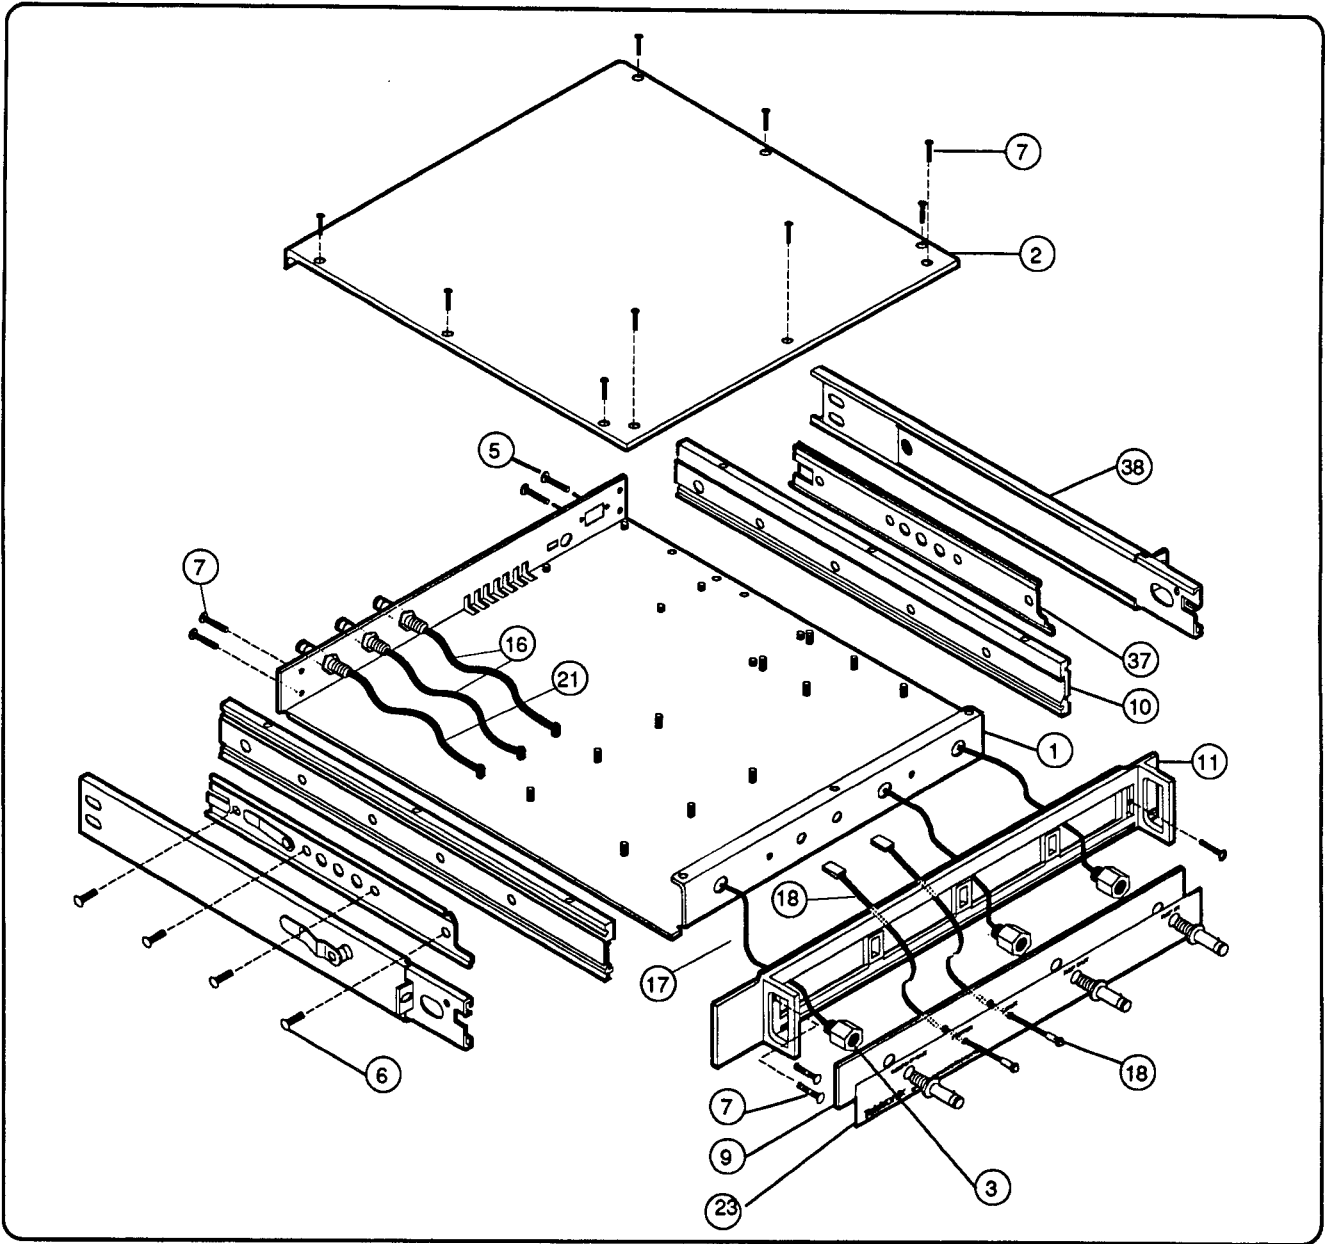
1, RF162 Exploded View (Standard Configuration).
